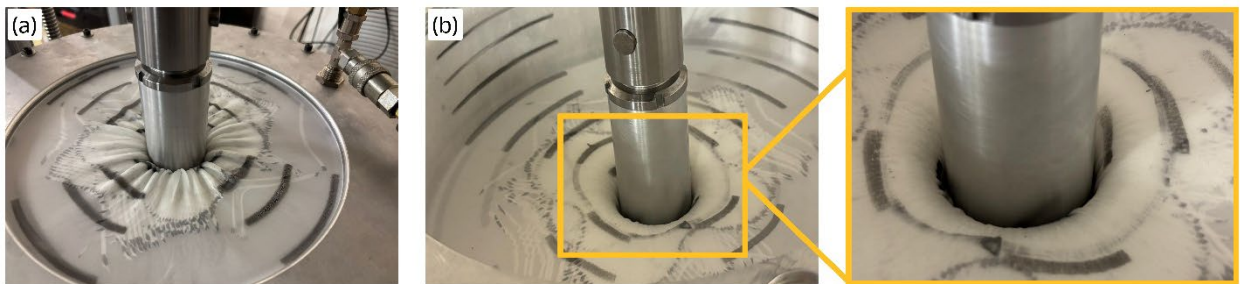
Wrinkling behaviour at 80mm displacement: a) NT blank holder, b) PT blank holder.
